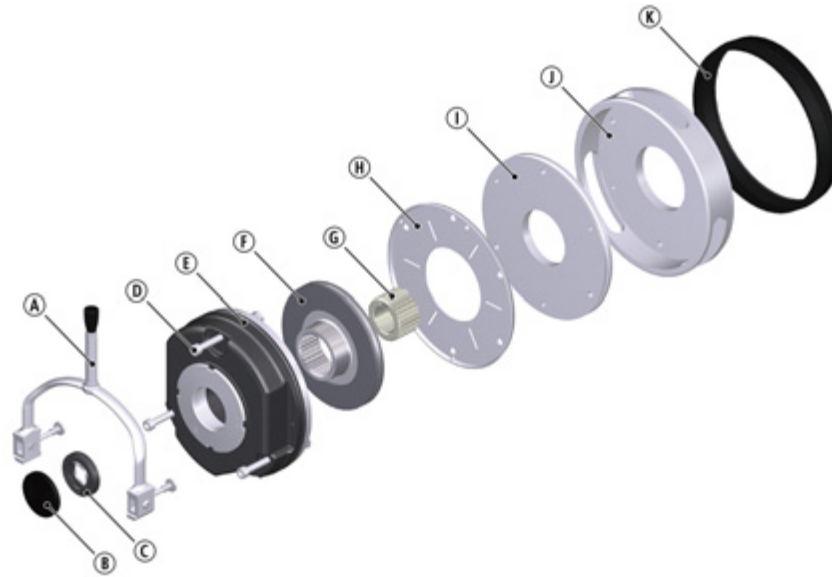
Spring-applied brake INTORQ BFK458-06 to 25
